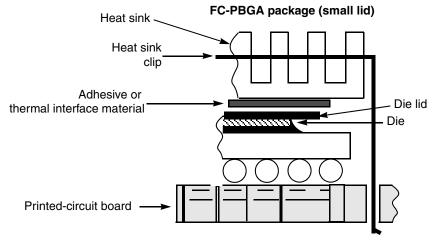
Exploded cross-sectional view—FC-PBGA (with lid) package
